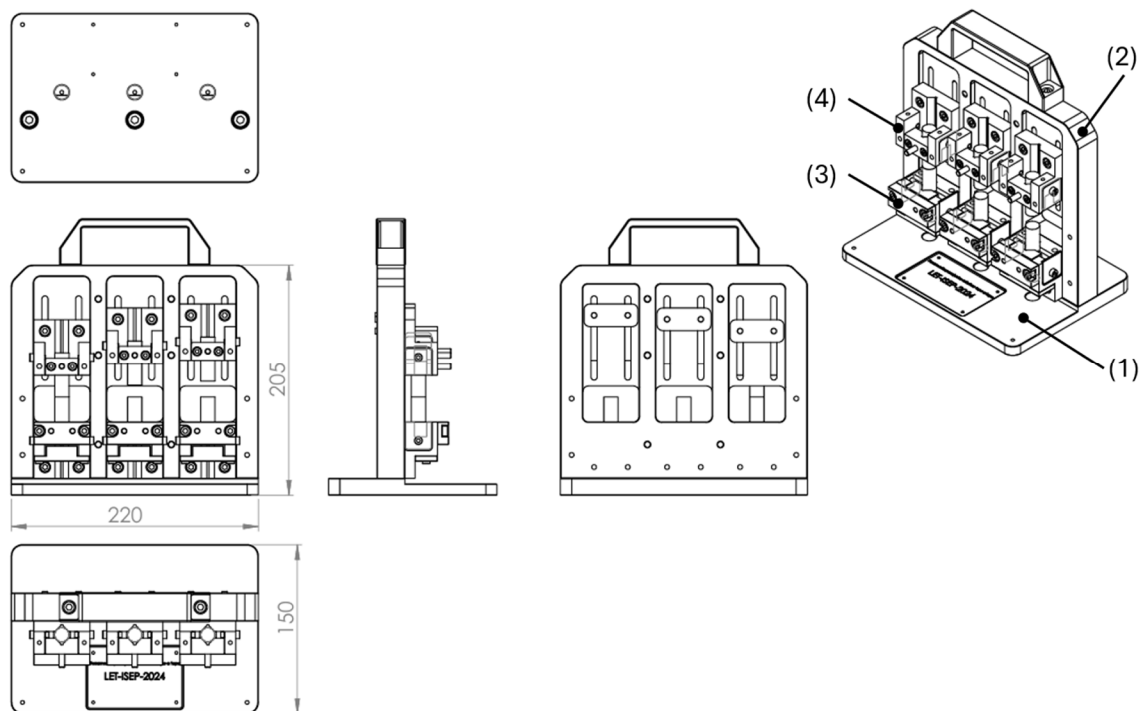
Engineering drawing of the jig designed for the fabrication of butt-joint specimens.
